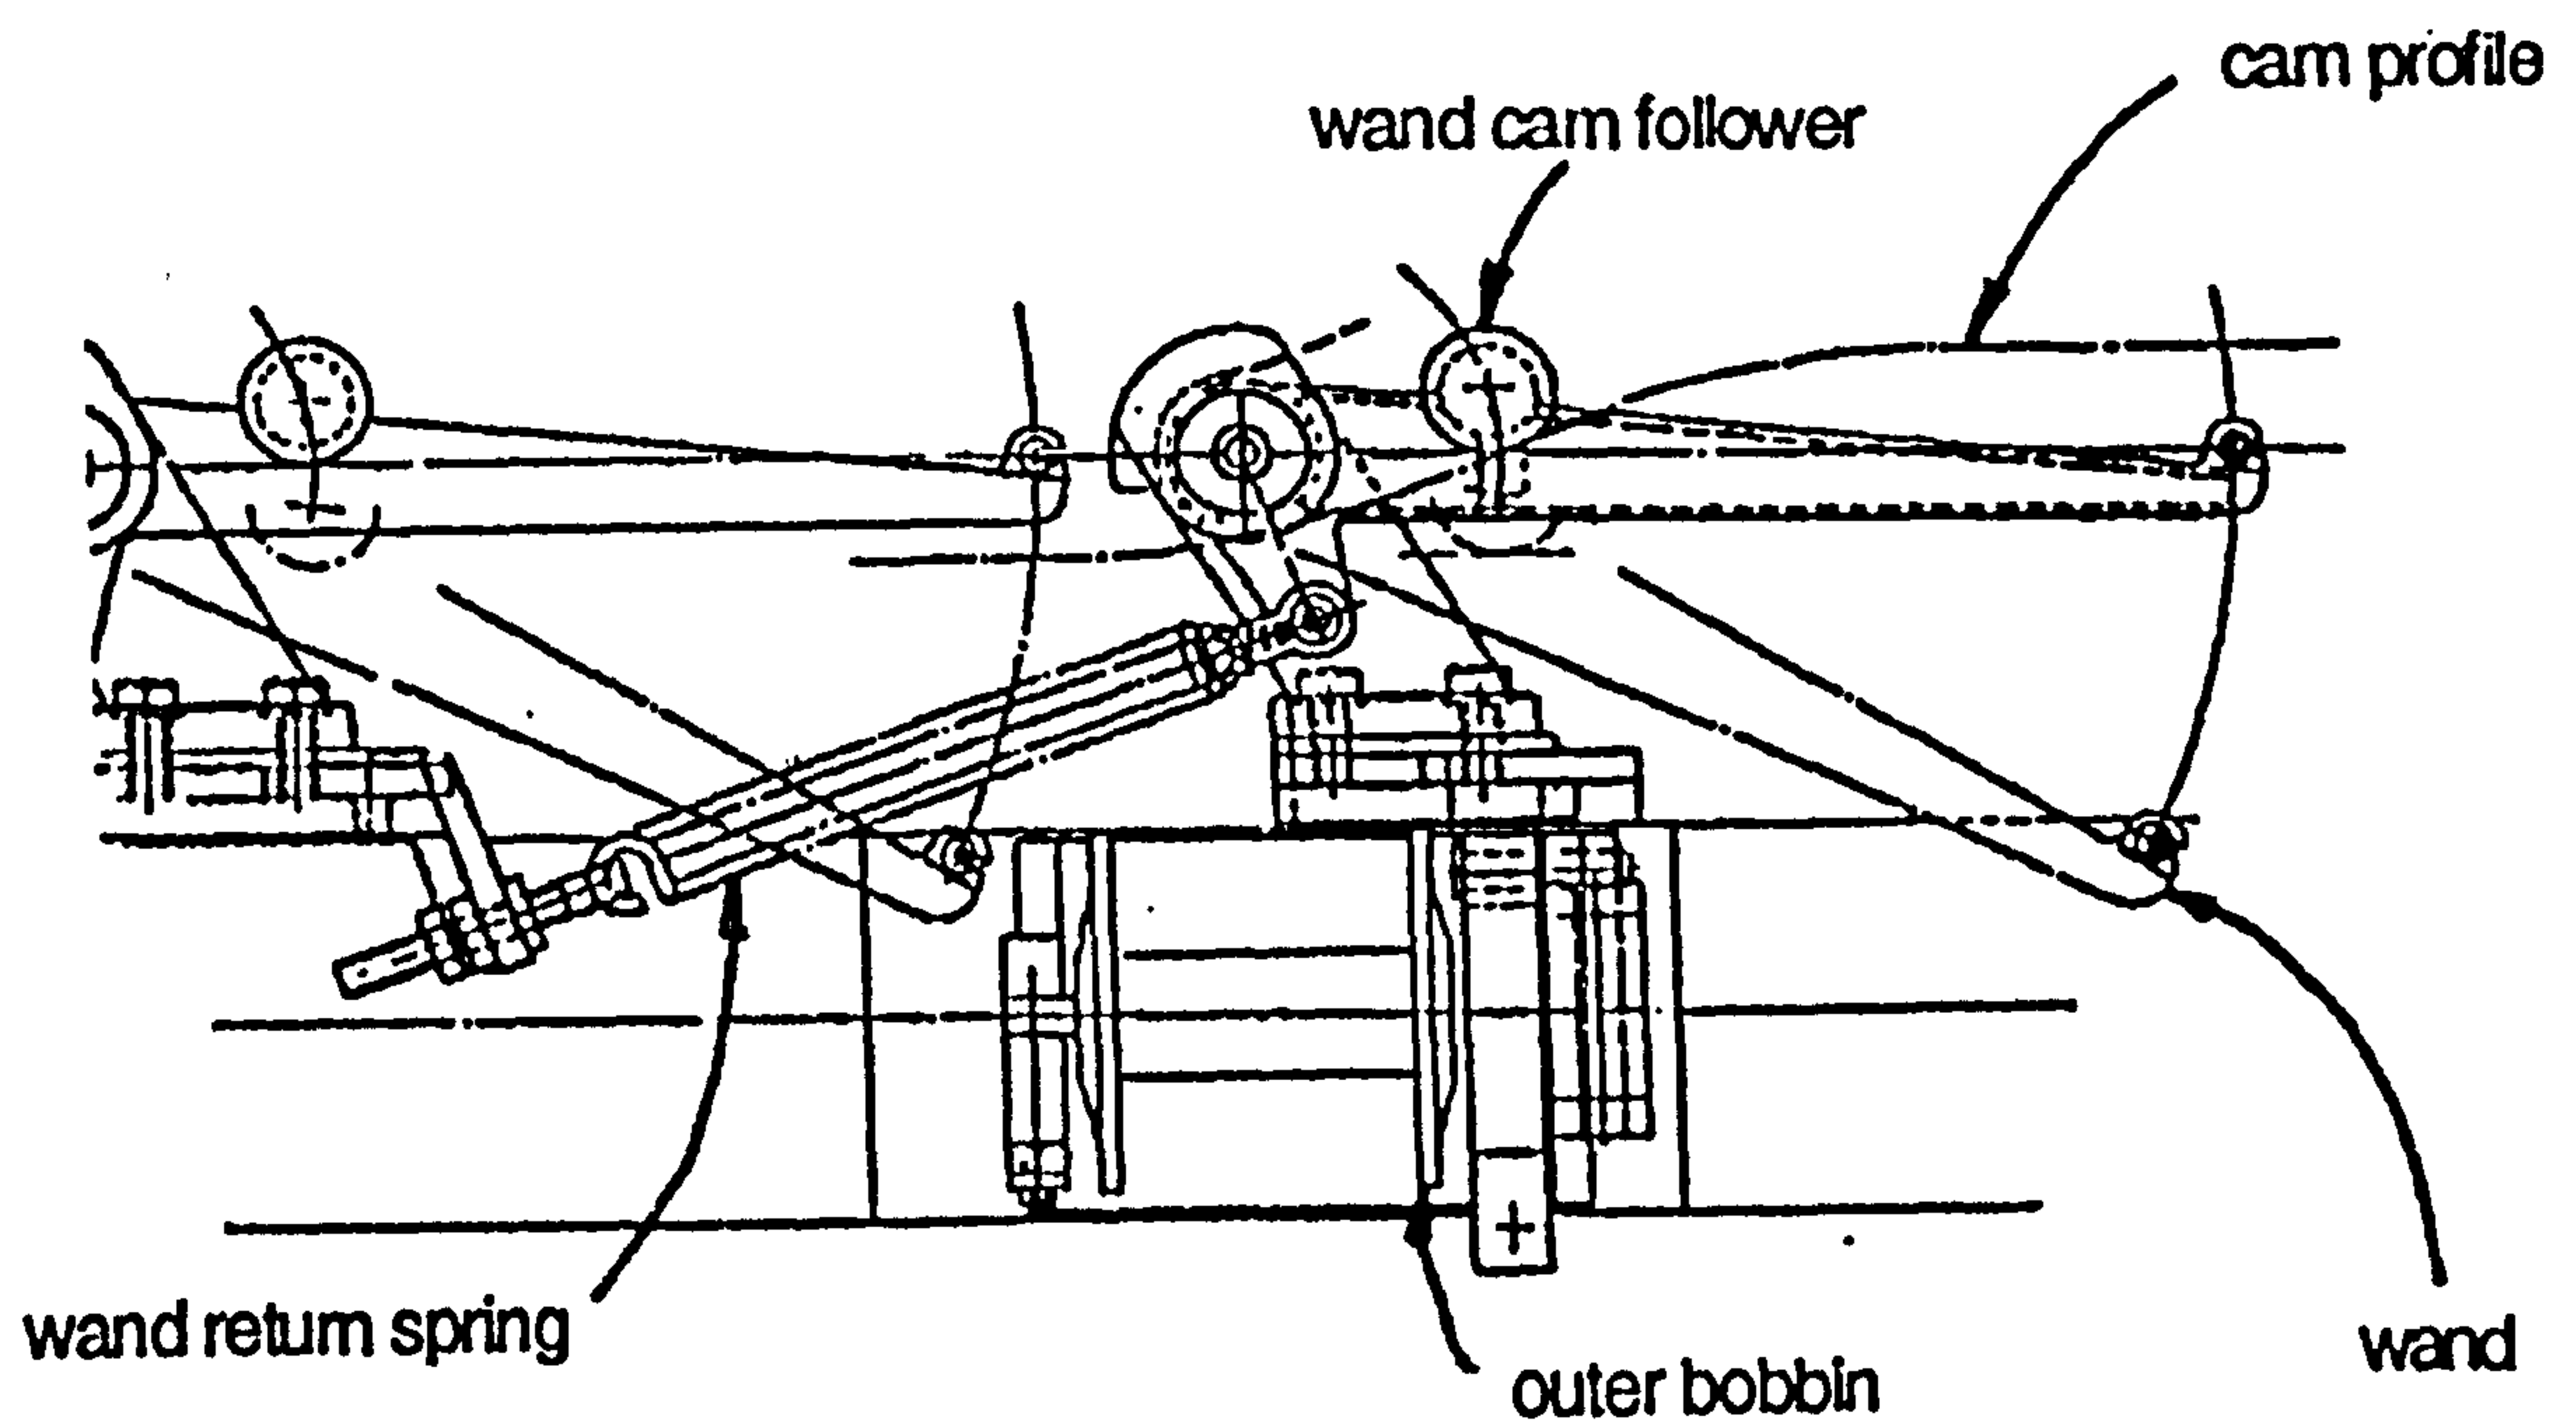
Scrap view of rotary braider wand arrangement
